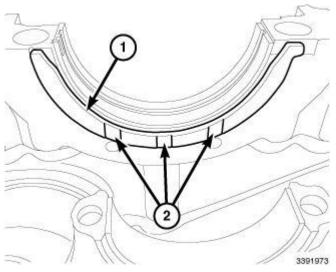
Thrust Bearings & Oil Discharge Groves Courtesy of CHRYSLER GROUP, LLC
